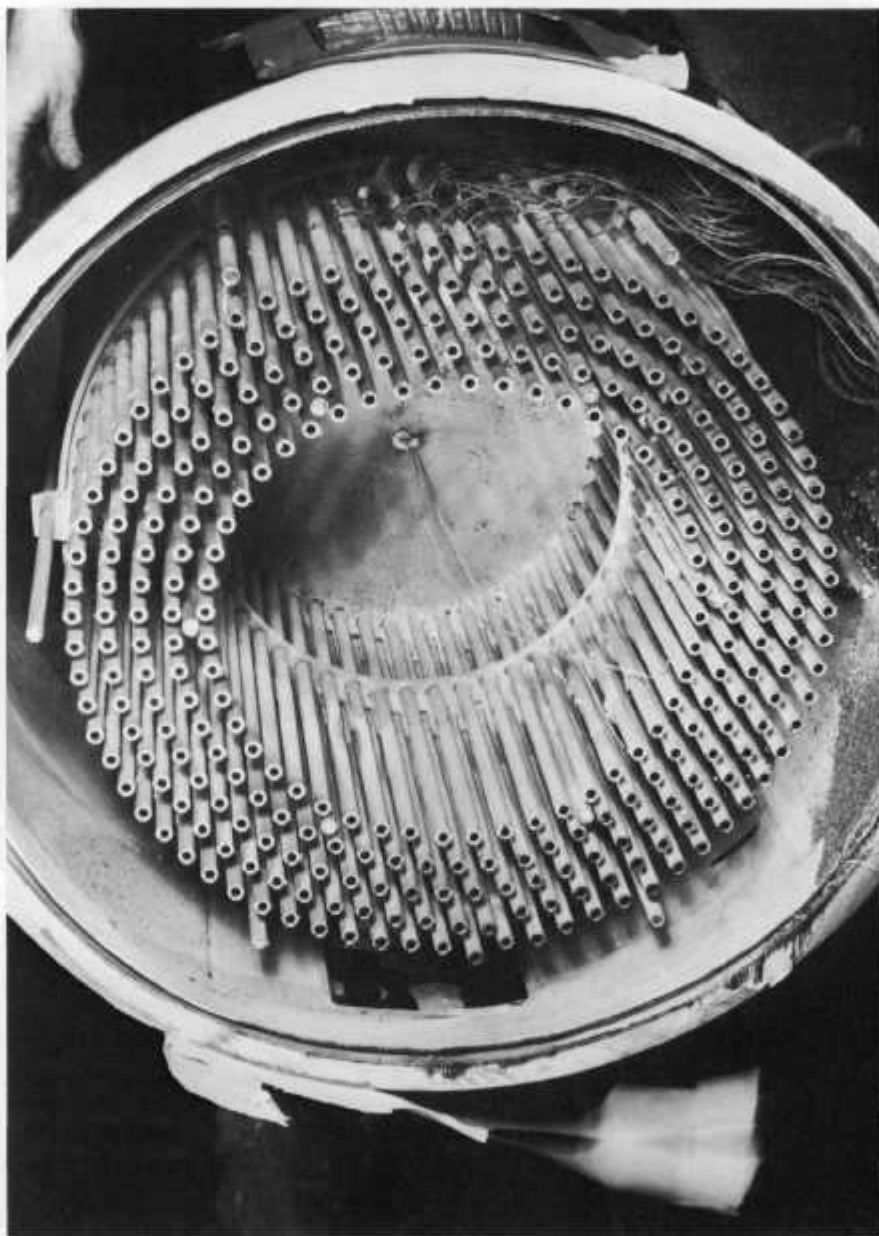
Appearance of Lower Tubesheet as Viewed from Sodium Side. Surfaces were clean except for presence of metallic sodium.
